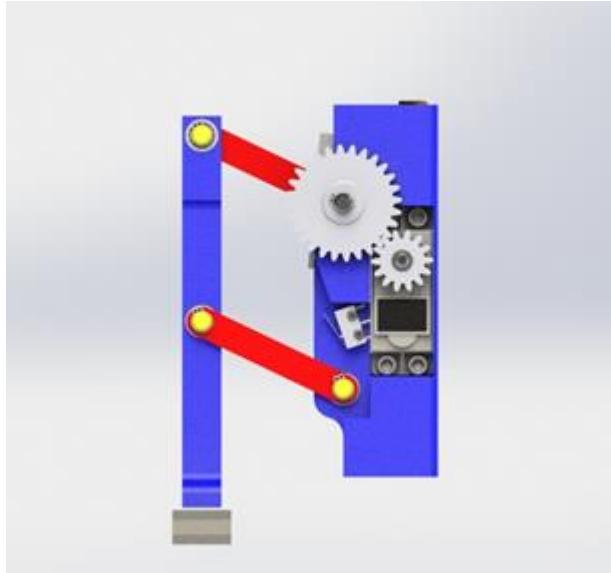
A right-hand view of a single stabilization module. Crank and follower links are highlighted in red. Coupler and base links are highlighted in blue.
